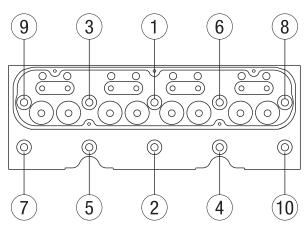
Buick Cylinder Head Bolt Torque Sequence
